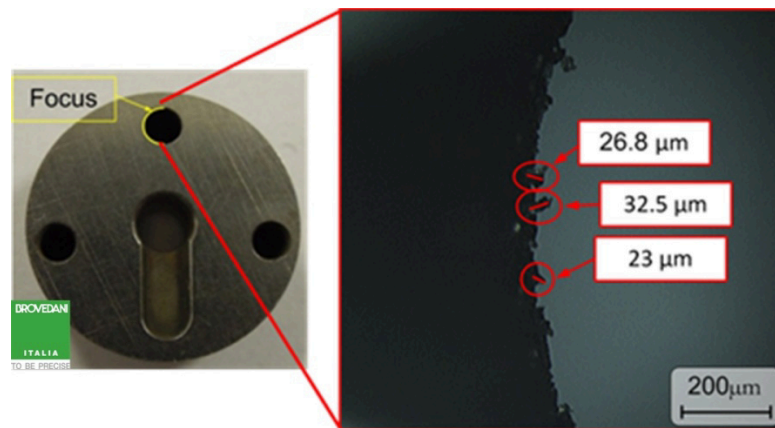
Micro scale burrs after grinding operation (Courtesy of Brovedani SpA)
